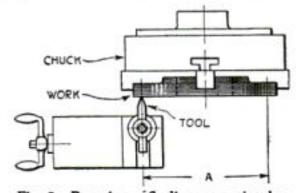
Running a fly line on a circular piece of work in the lathe with a fine pointed tool
